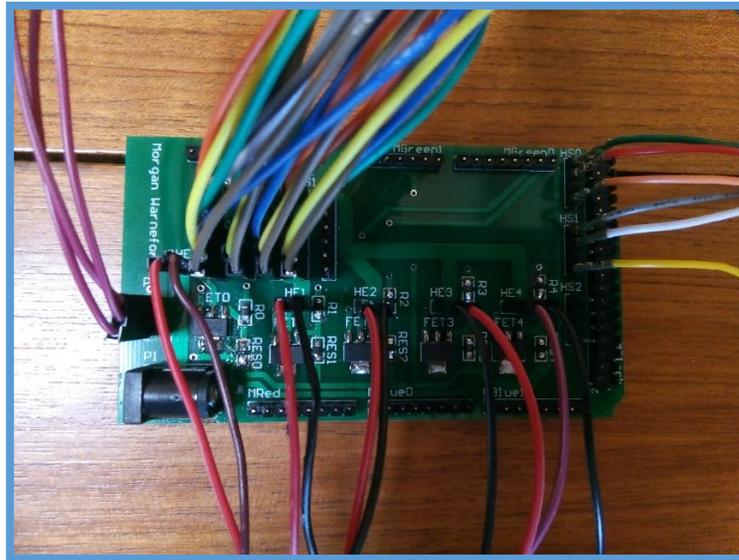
Final PCB with all headers, resistors and MOSFETs attached.
